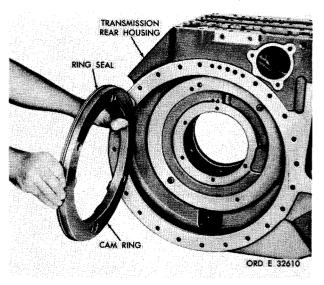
Removing (or installing) right-brake apply cam stationary ring
